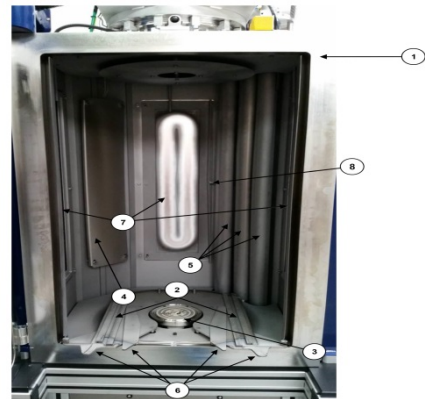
Vacuum chamber of a vacuum coating installation - (UDP - 850/4): 1 – Vacuum chamber; 2 - guides when moving the carousel; 3 - main carousel drive; 4 - heater (flat, infrared); 5 – thermocouples; 6 – locking lever system; 7 - 2nd, 3rd and 4th targets (from left to right); 8 – operating gas line
